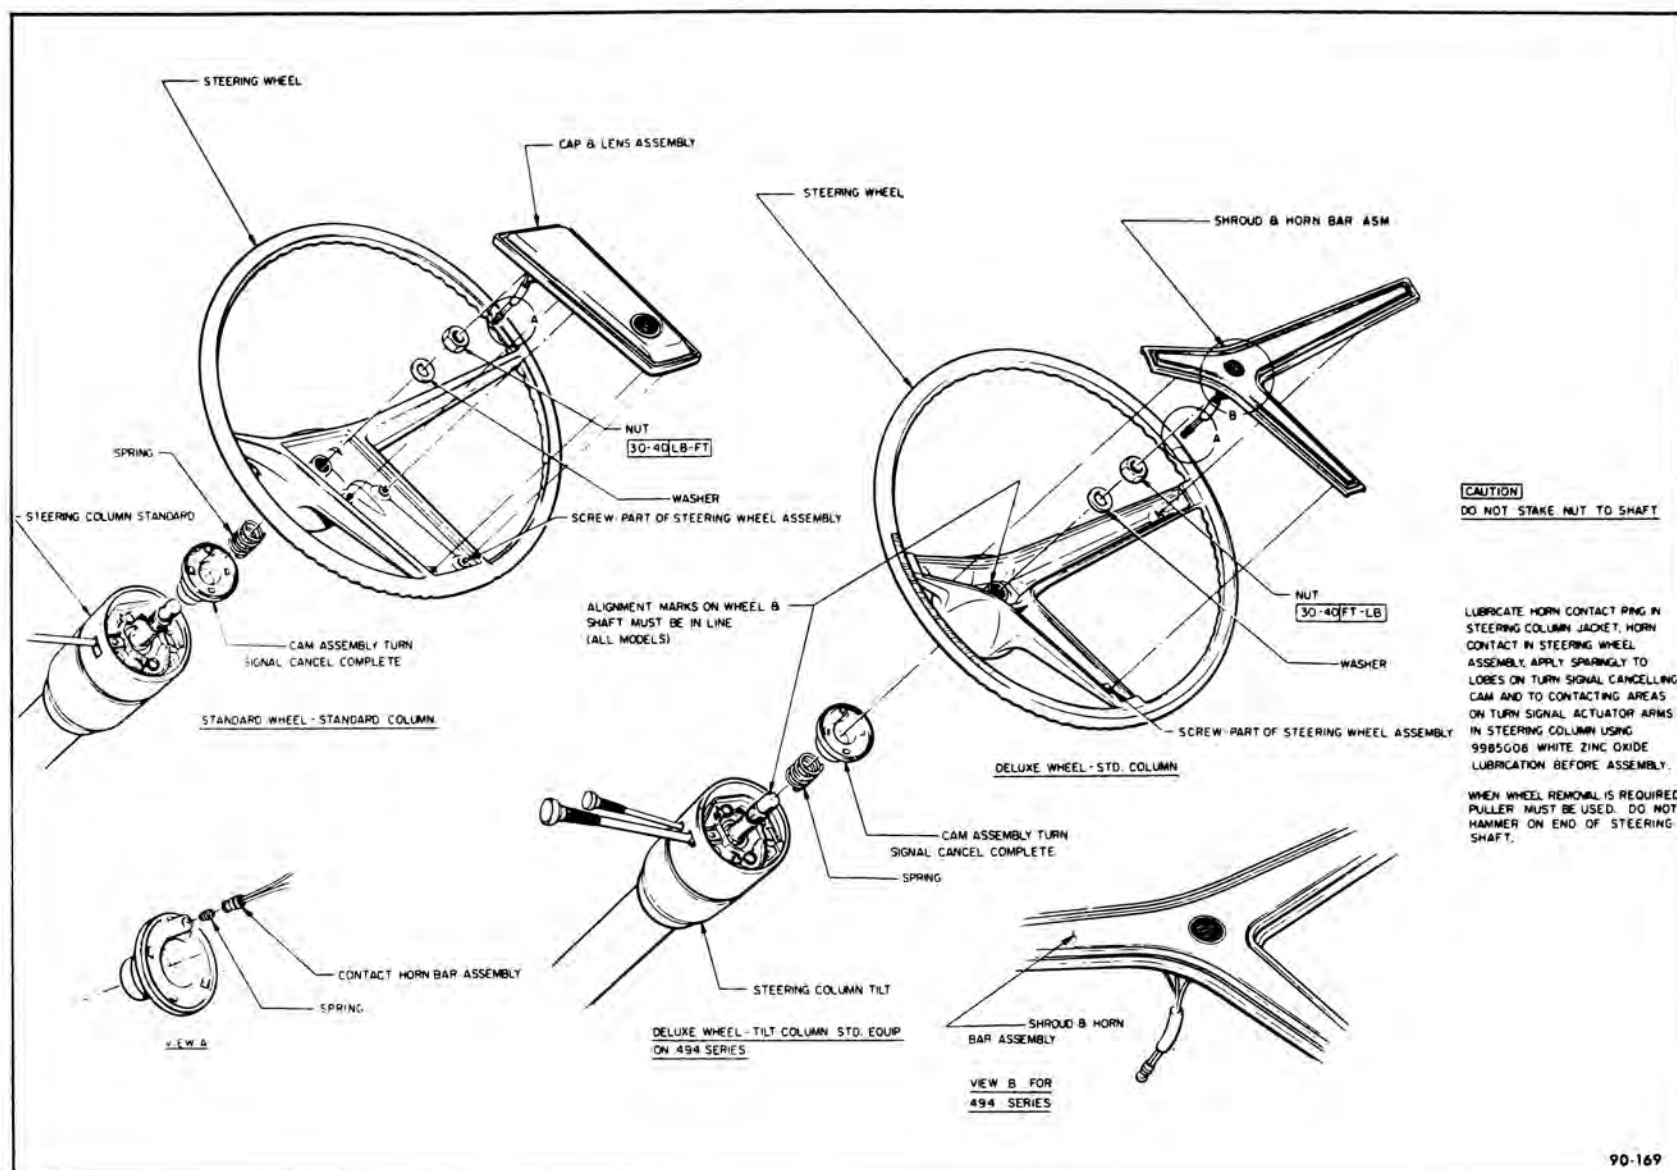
Steering Wheel Installation (45-46-48-49000 Series)
